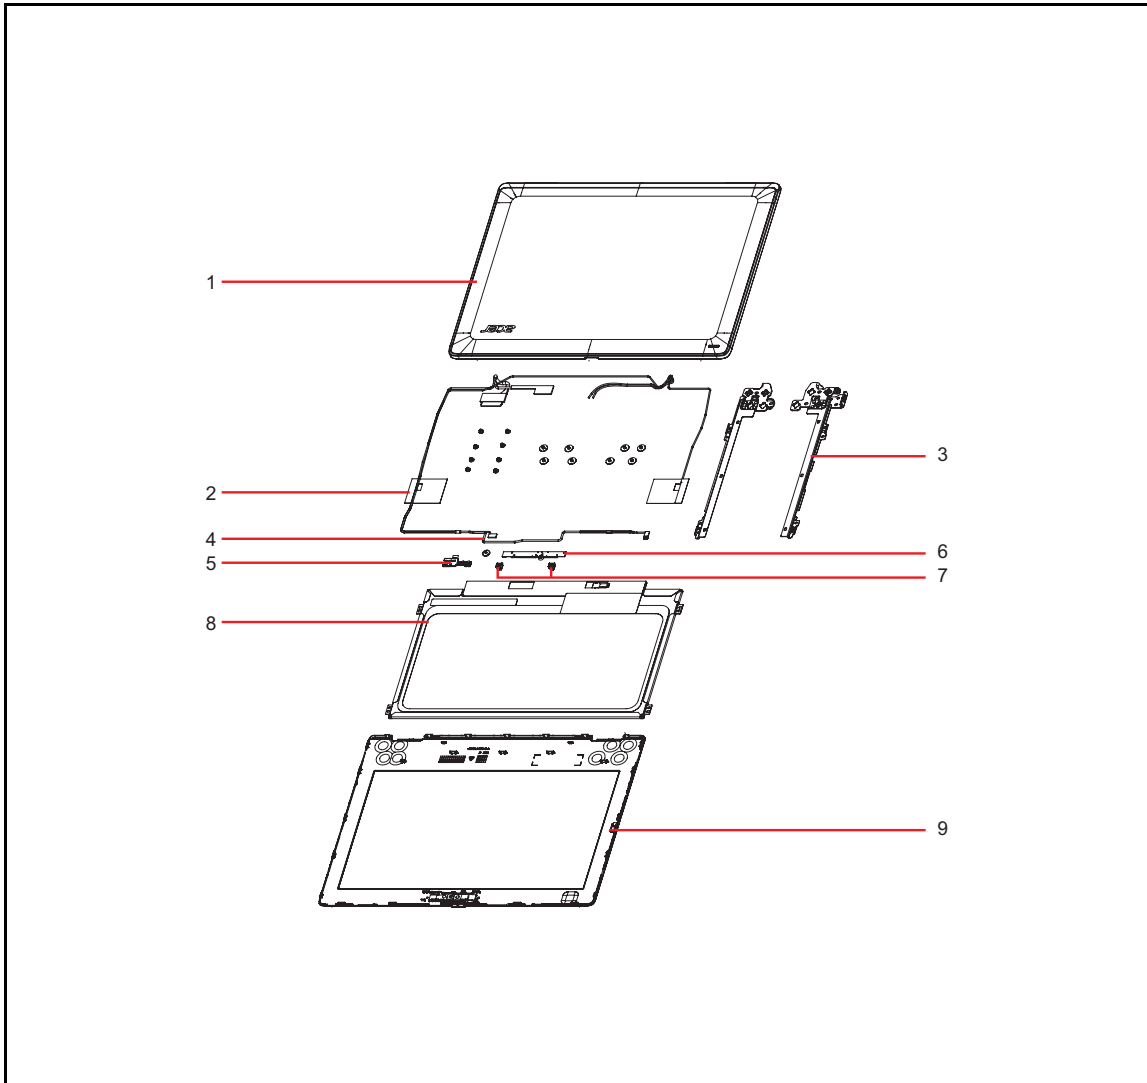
LCD Assembly Exploded Diagram (B311-32)
